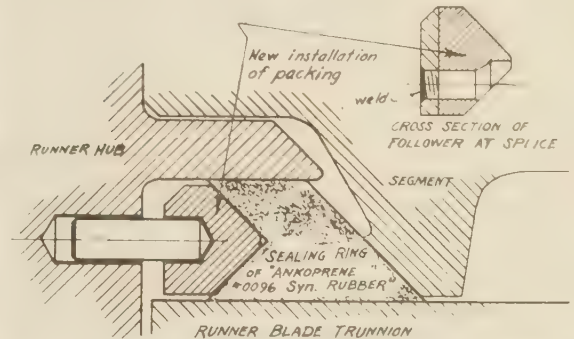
NEW INSTALLATION OF RUNNER-BLADE PACKING
